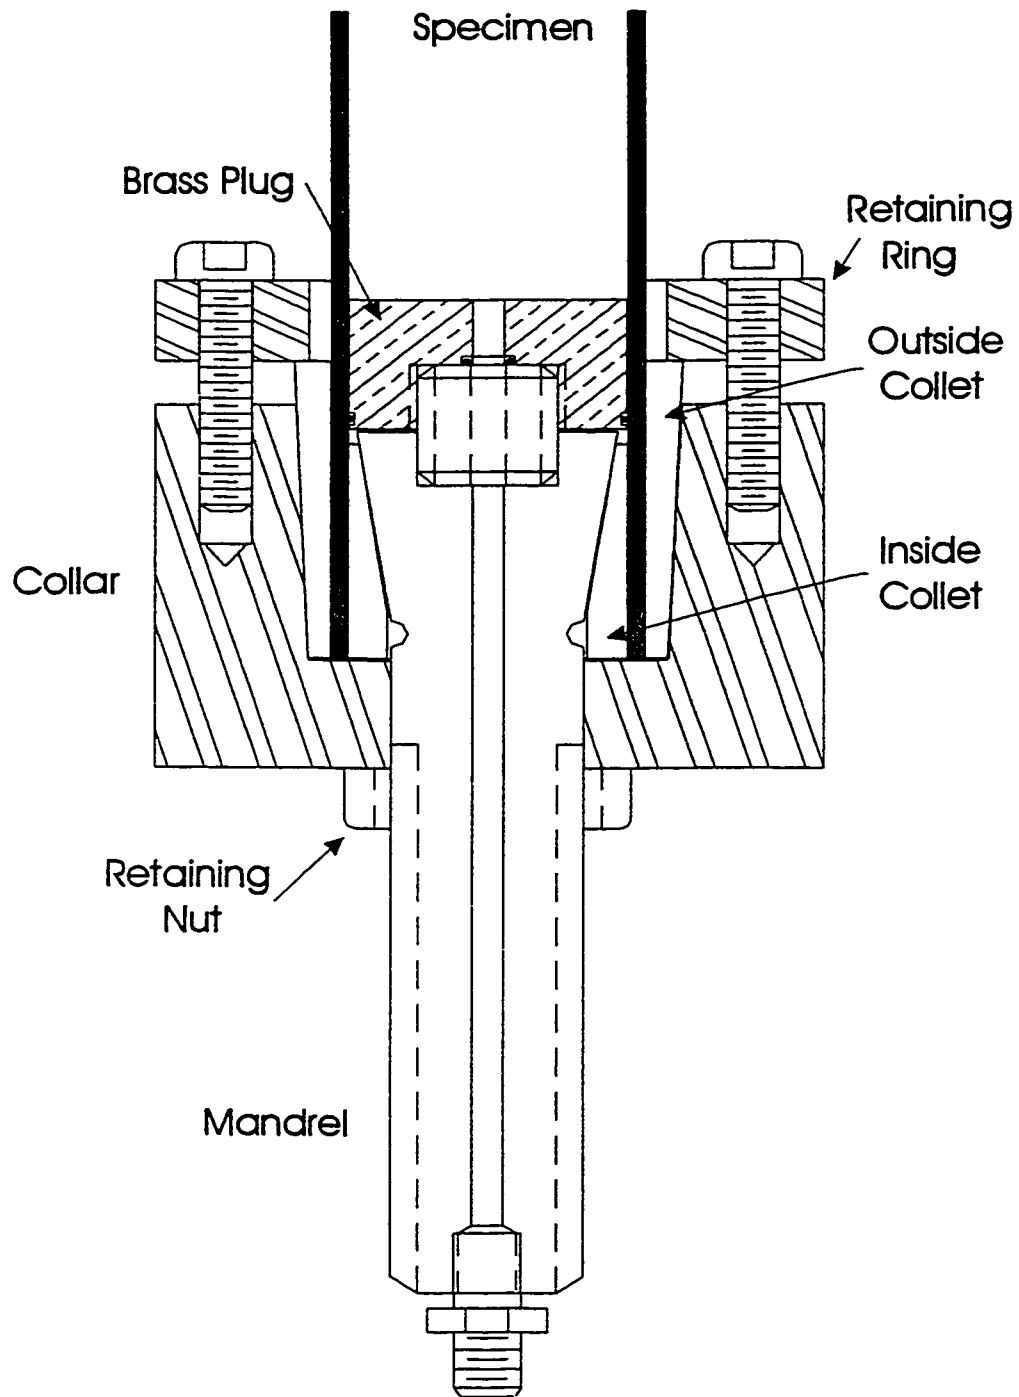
Schematic illustration of the grip assembly developed by Carroll (1994), figure adapted from Carroll (1994).
